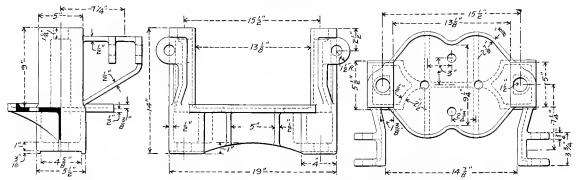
Cast Steel Combined Truck Column or Bolster Guide, Brake Hanger and Spring Seat.
